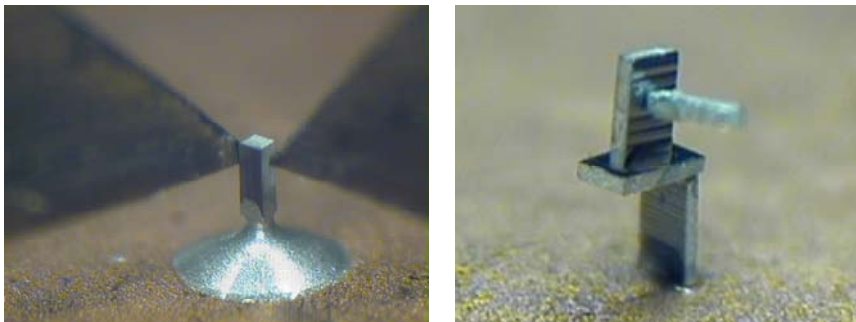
Ortho tweezer rotating a block. Figures courtesy Eiji Shimada.
